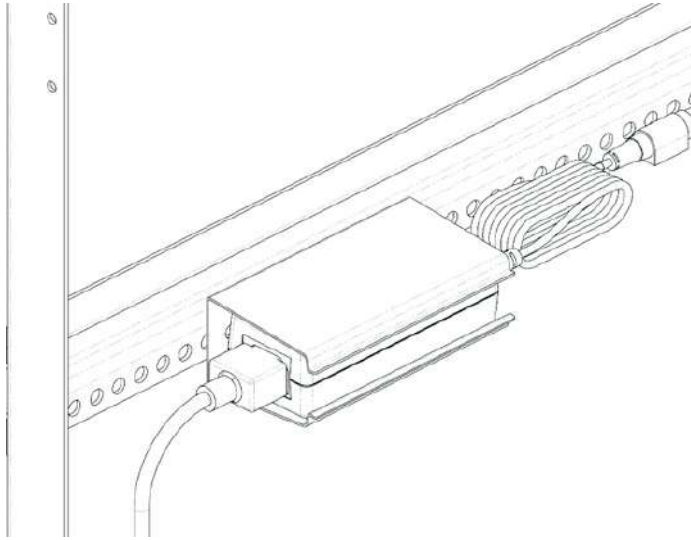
Mounting Bracket – Horizontal on a Crossbar
